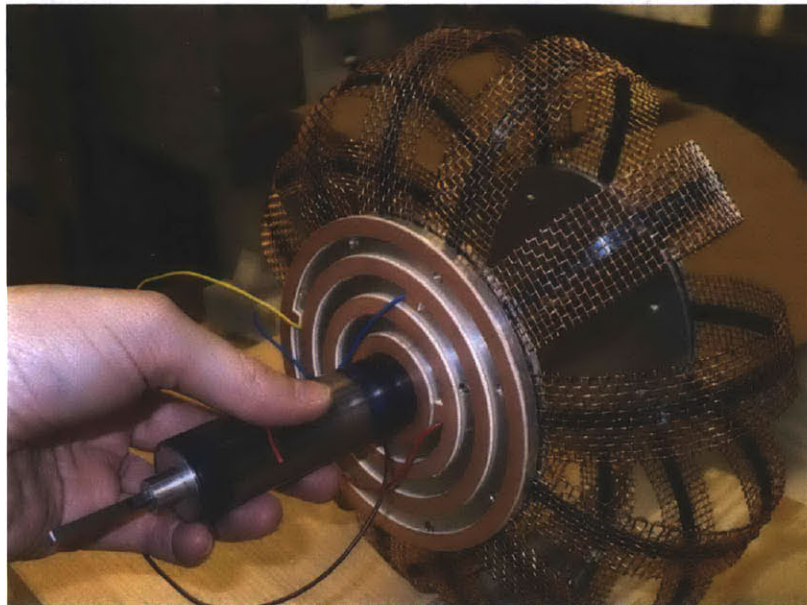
Wheel axle, hollow tube, and inner hubcap all pinned together
